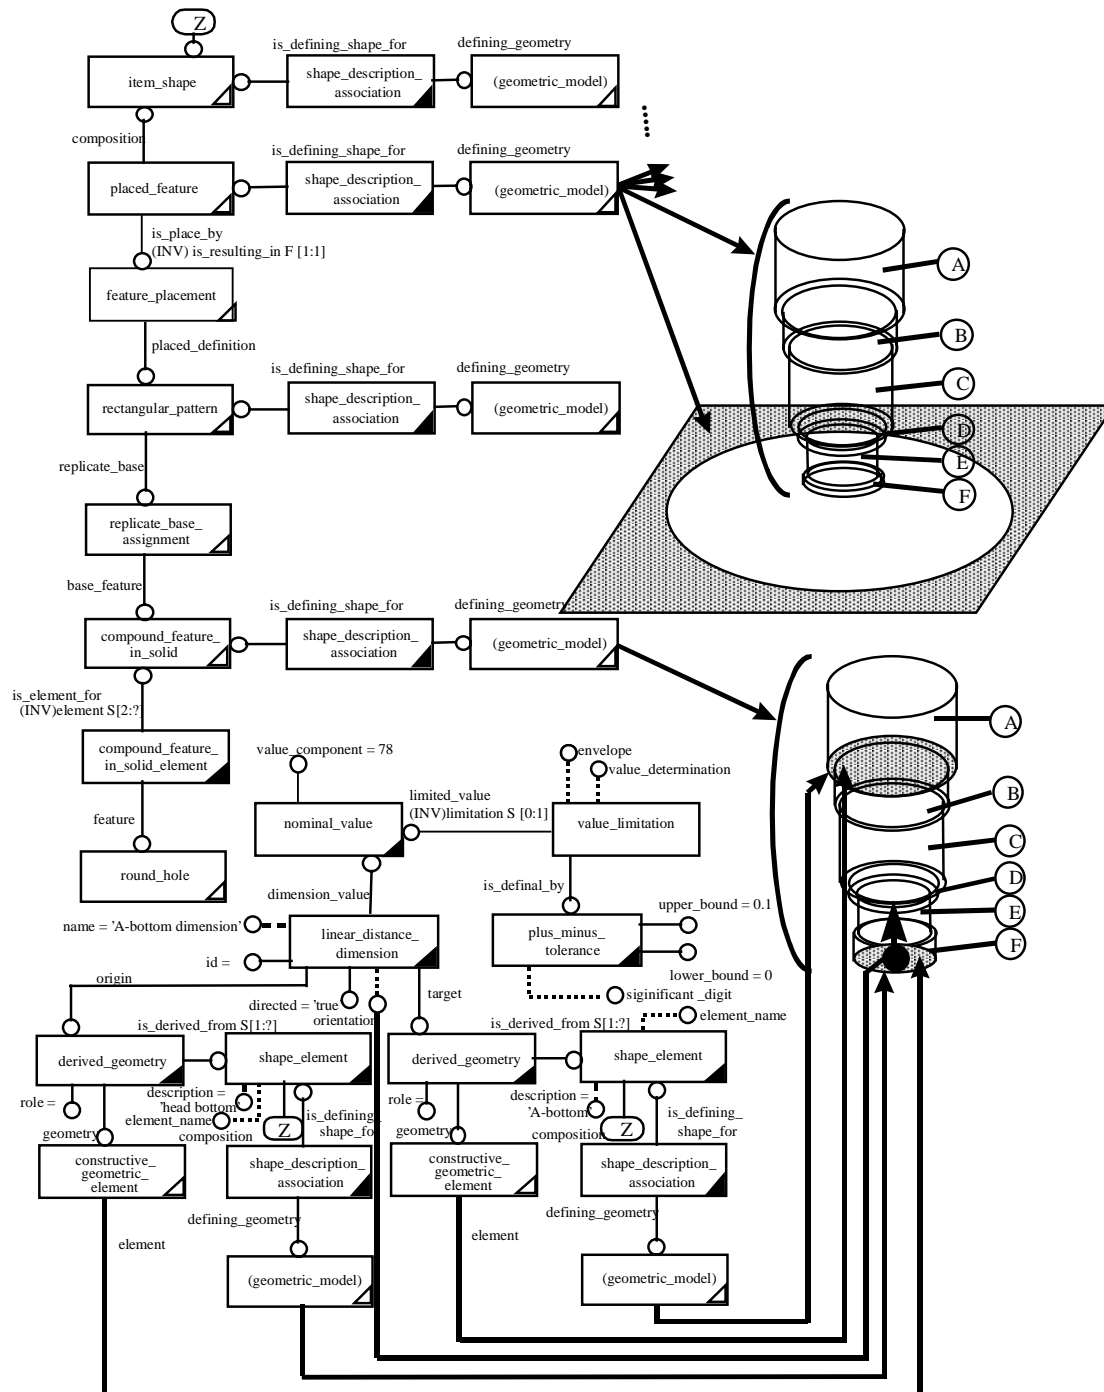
Instance of ignition plug hole when using tolerance with shape
